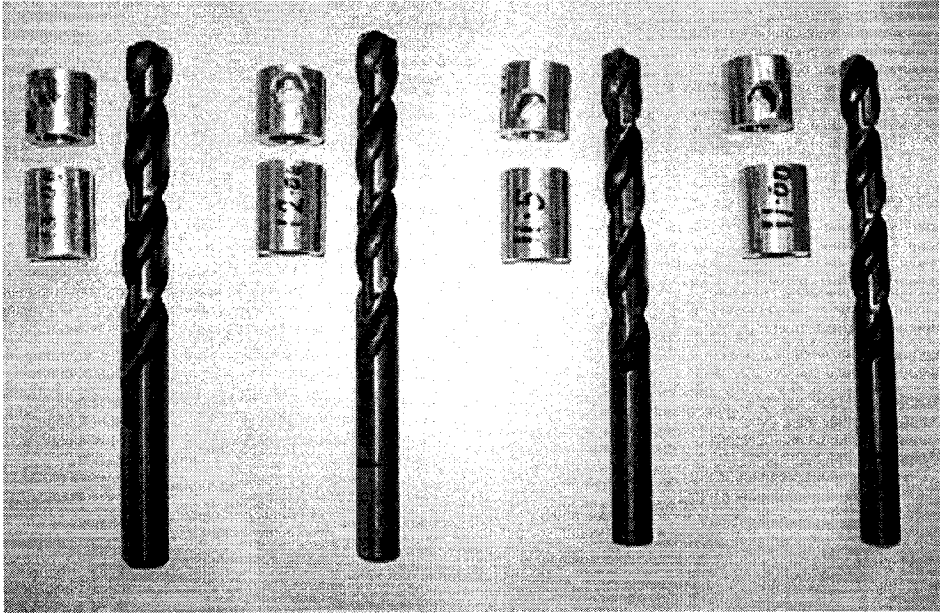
Twist Drills Tested on Torsion Test Fixture
